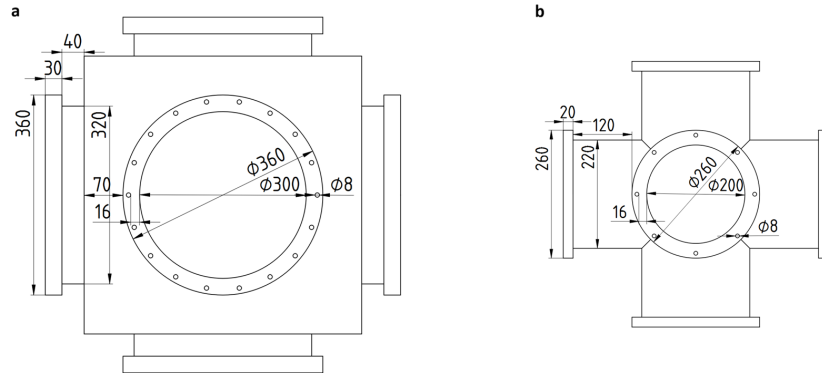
Technical drawing depicting the left, right, top, bottom, front, and back view of the a) preparation chamber, b) load lock chamber. Units of length are in millimeters.
